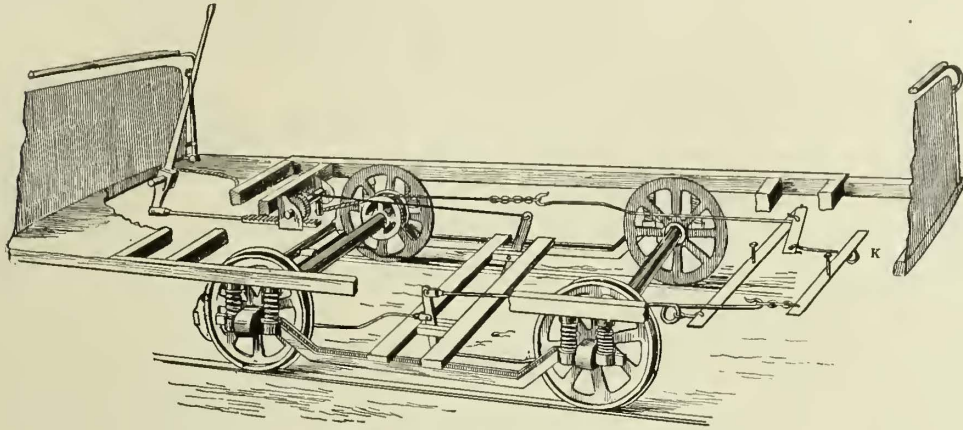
TRUCK EQUIPPED WITH CROSSLEY FRICTION BRAKE.
